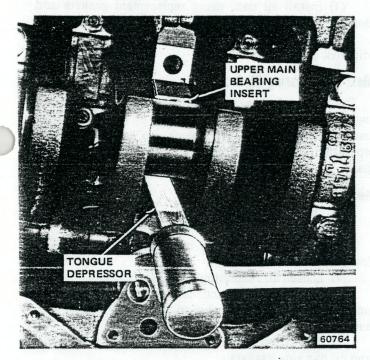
B-93 Removing No. 4 Main Bearing Insert
